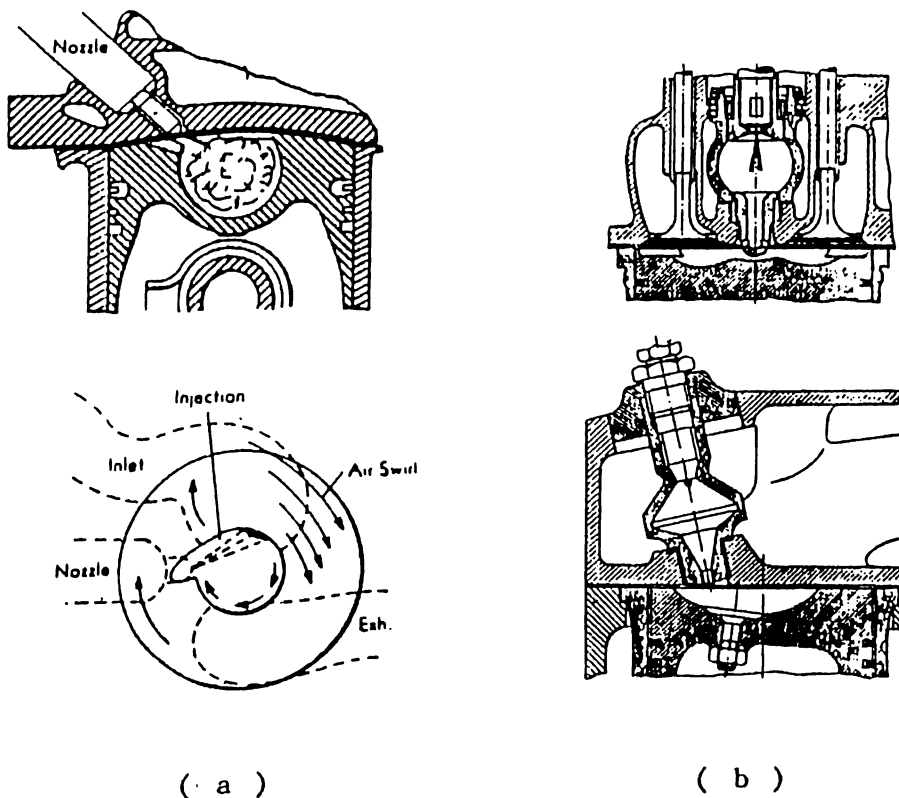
Combustion chamber types: (a) open chamber (b)prechamber
